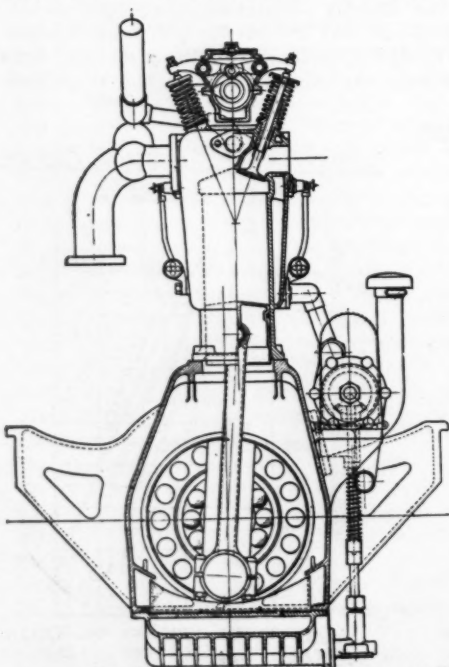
Cross-sectional view of the Stutz racing engine showing valve mechanism
